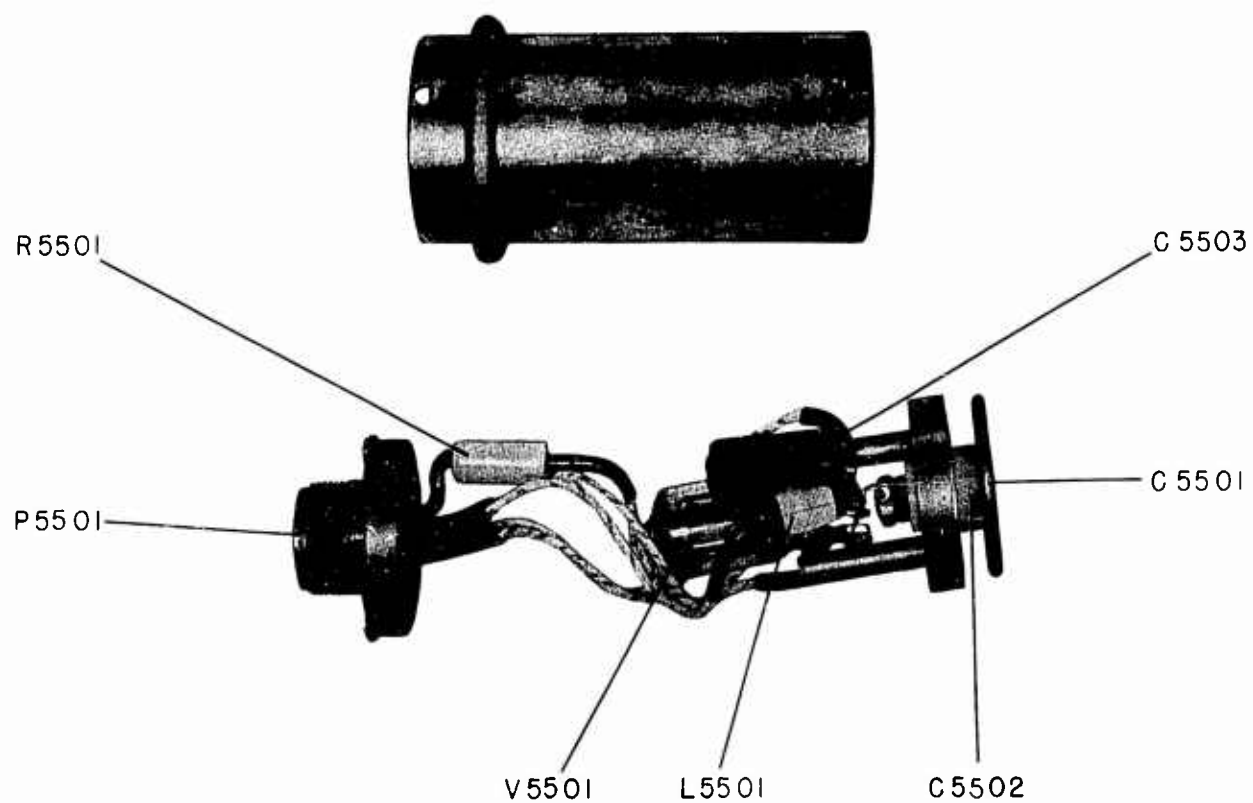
B. Grid Feedback Probe Z509, Shell Removed.
